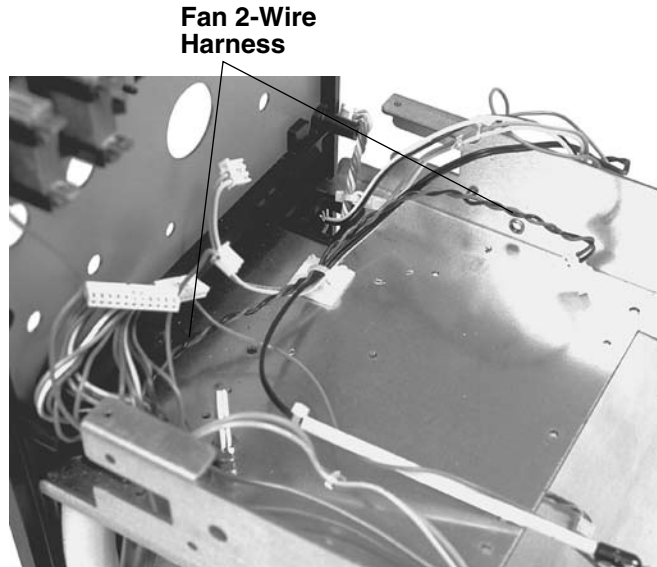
Fan RED/BLACK wiring harness (shown in GMS model, with Main Circuit Board removed)
